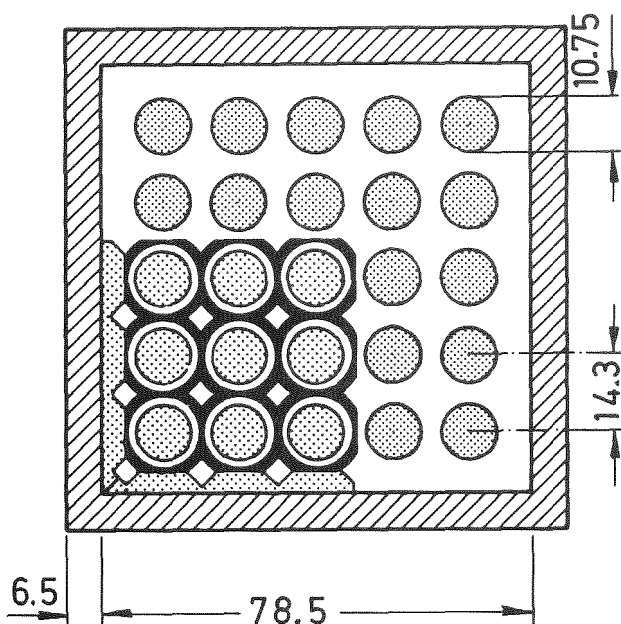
5x5 rod bundle: Working drawing of the 62% blockage device
